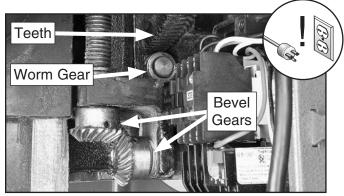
Worm gear, bevel gears, and blade angle trunnion teeth.
